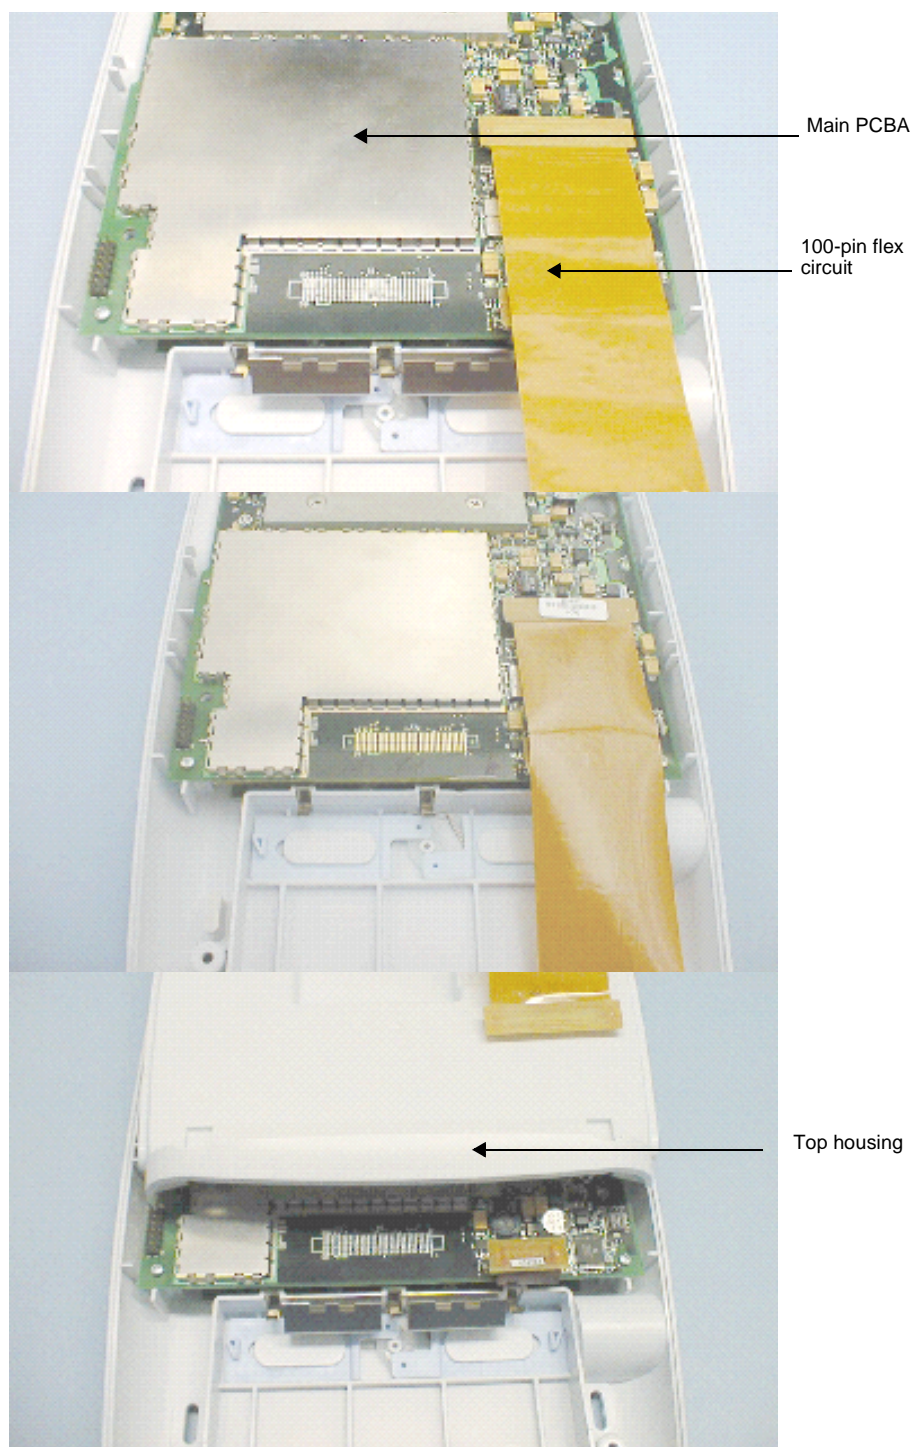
Setting the Top Housing Onto the Bottom Housing
